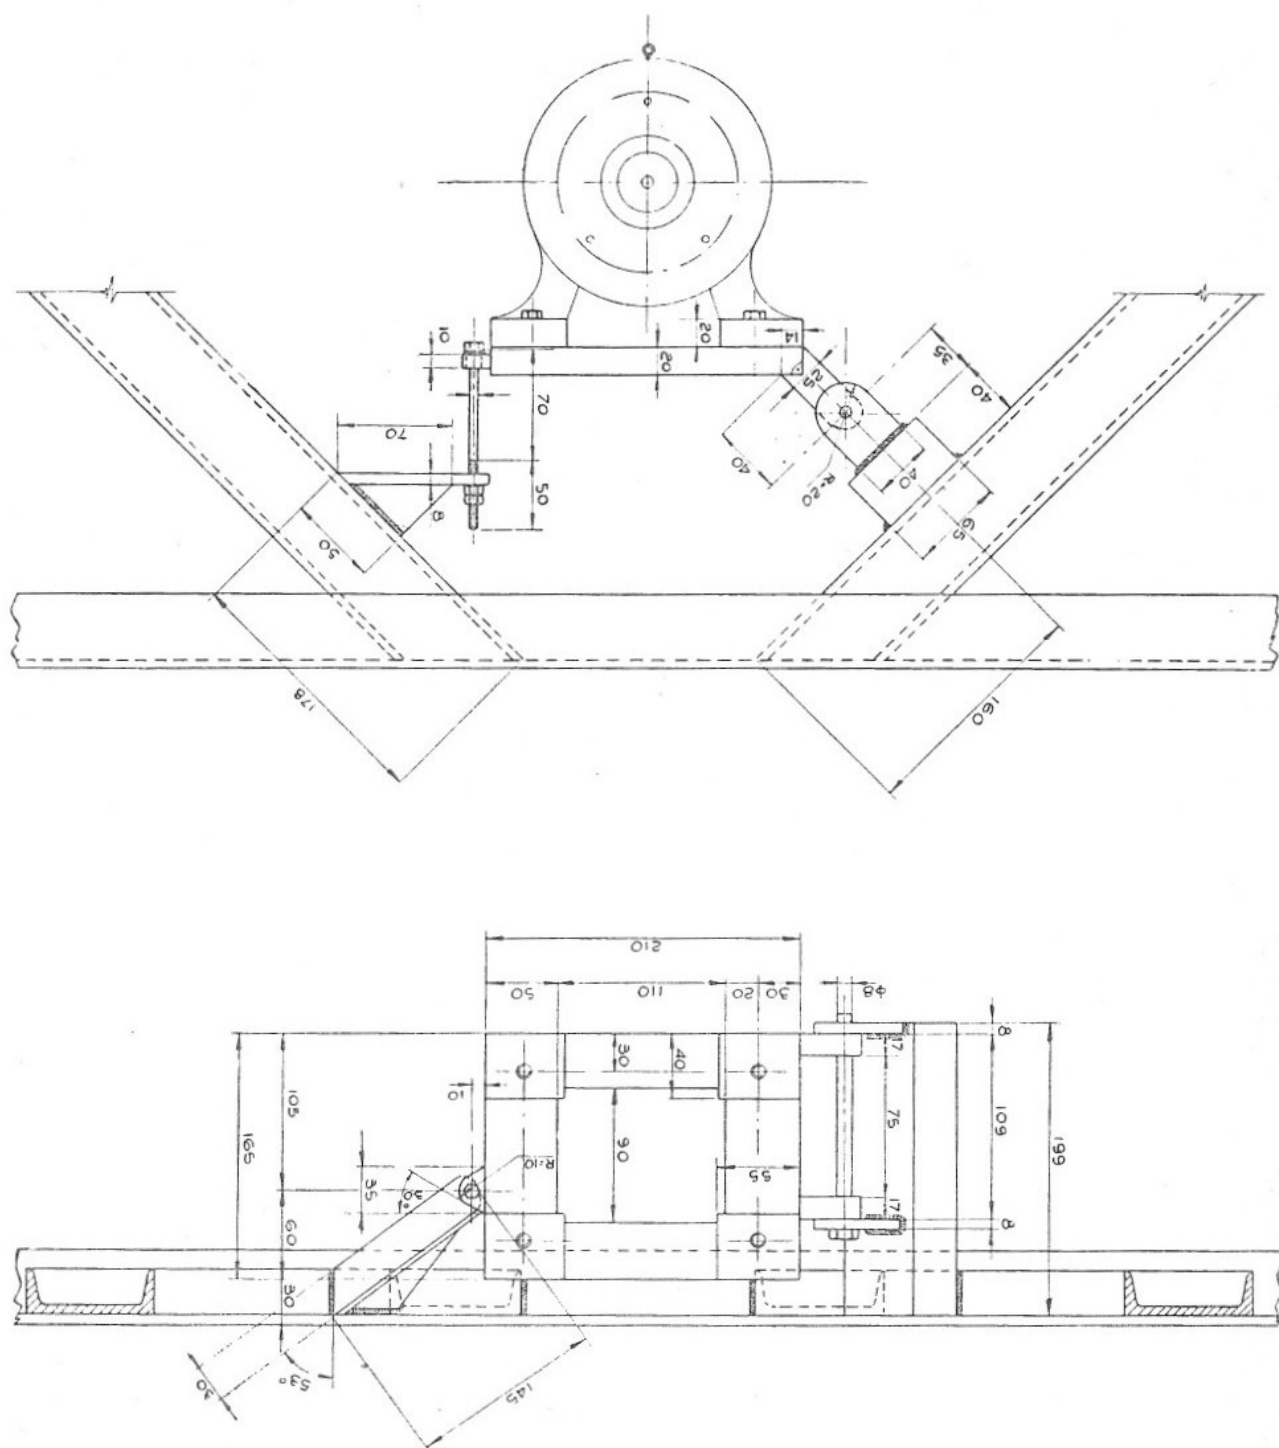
a. - Constructional detail of 4 - Suspension of motor.
